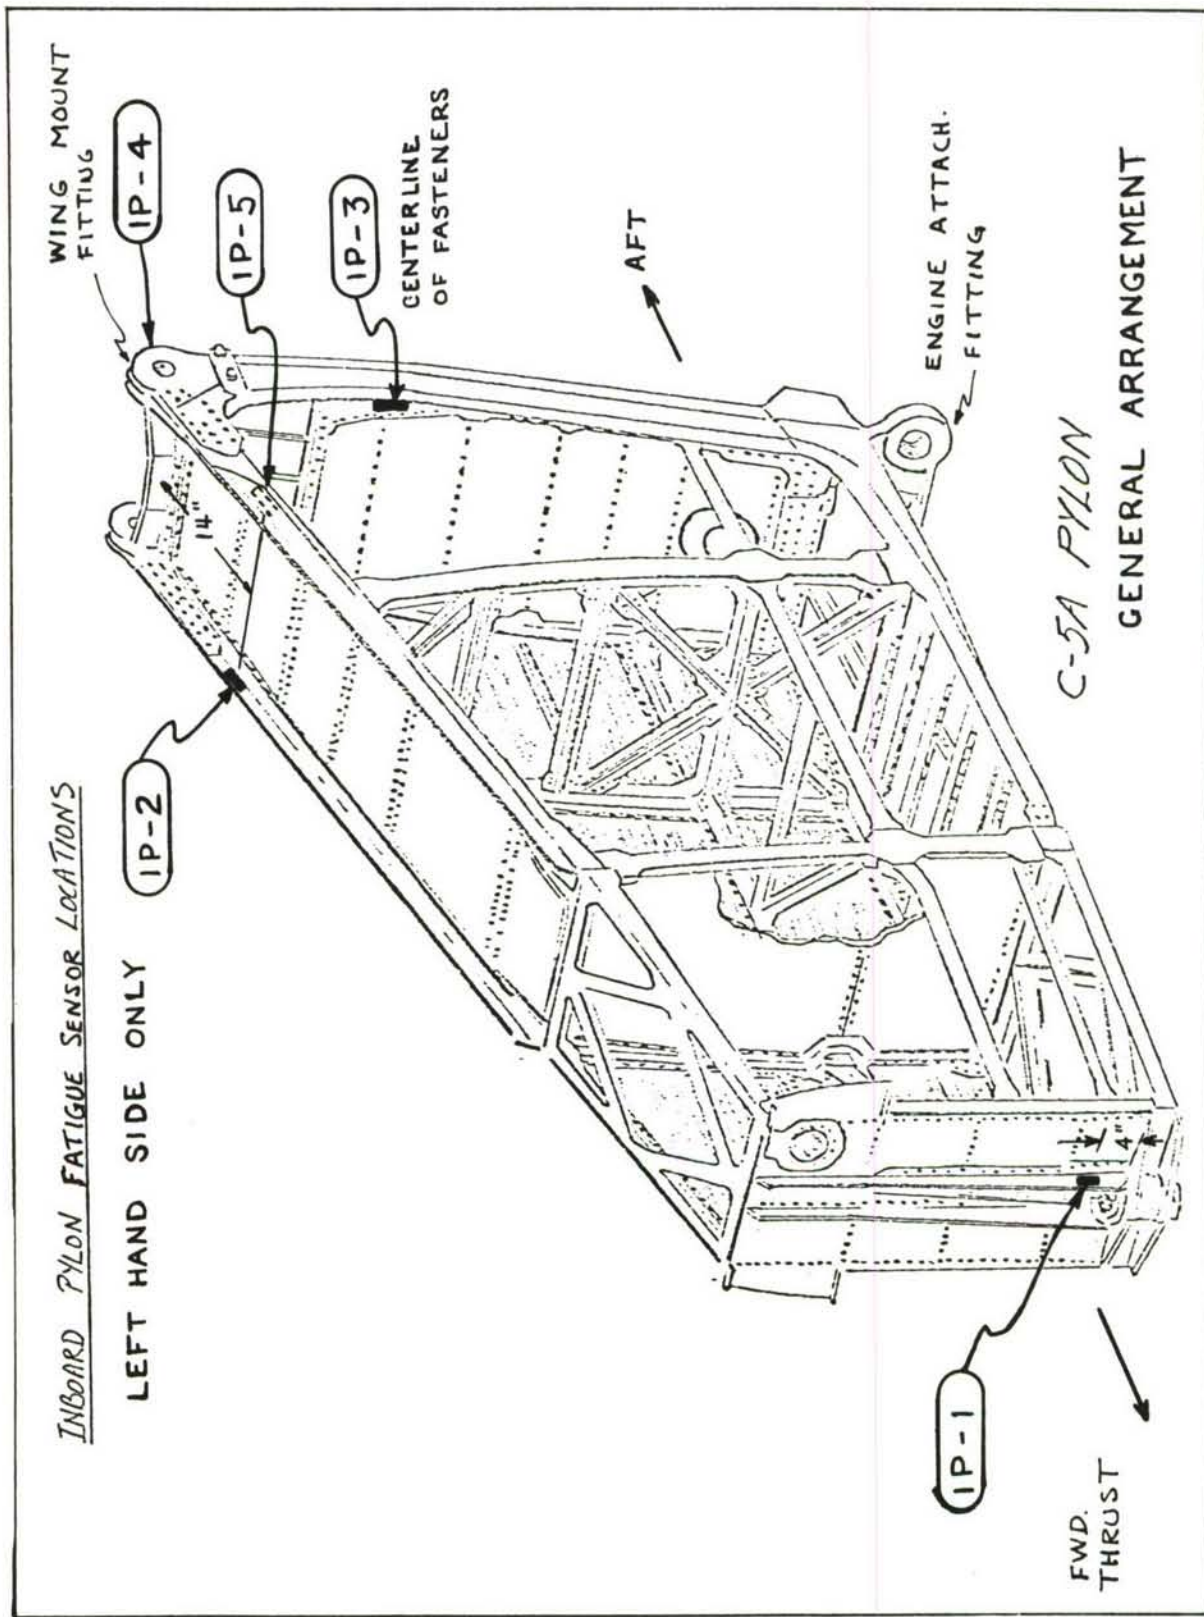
SENSOR LOCATIONS ON THE LEFT INBOARD ENGINE PYLON
